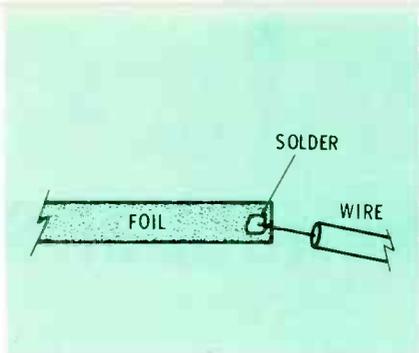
Don't solder the wire to the foil as shown here, but use approved-type connectors, otherwise breakage can occur.
